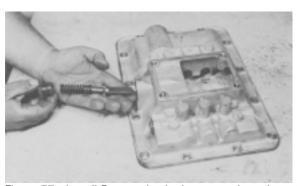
Install Reverse latch plunger, spring, pin and plunger spring plug.
